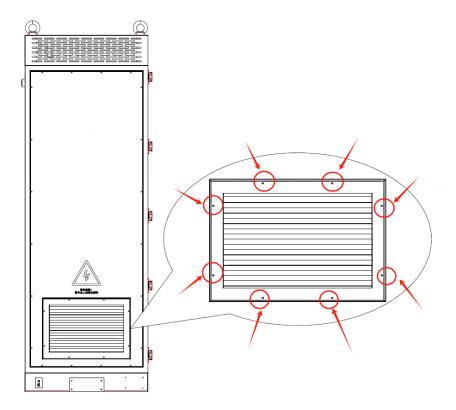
Position of cabinet sealing board (KYT25kW-60kWh-A for example)
